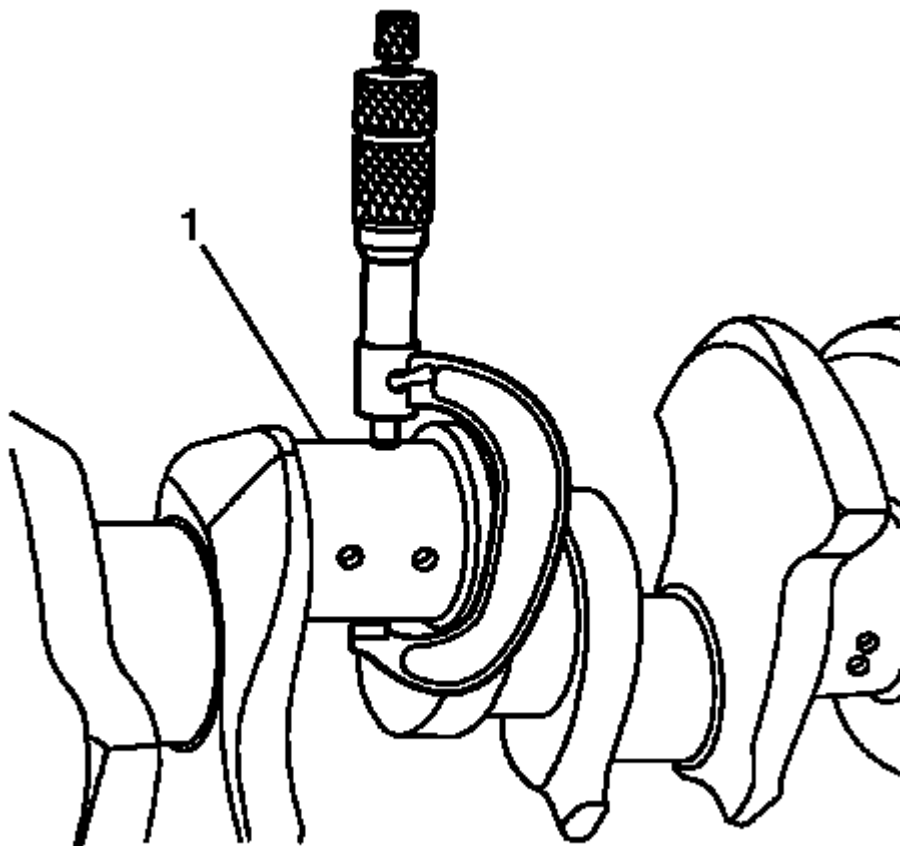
Measure Crankshaft Journals For Out-Of-Round
